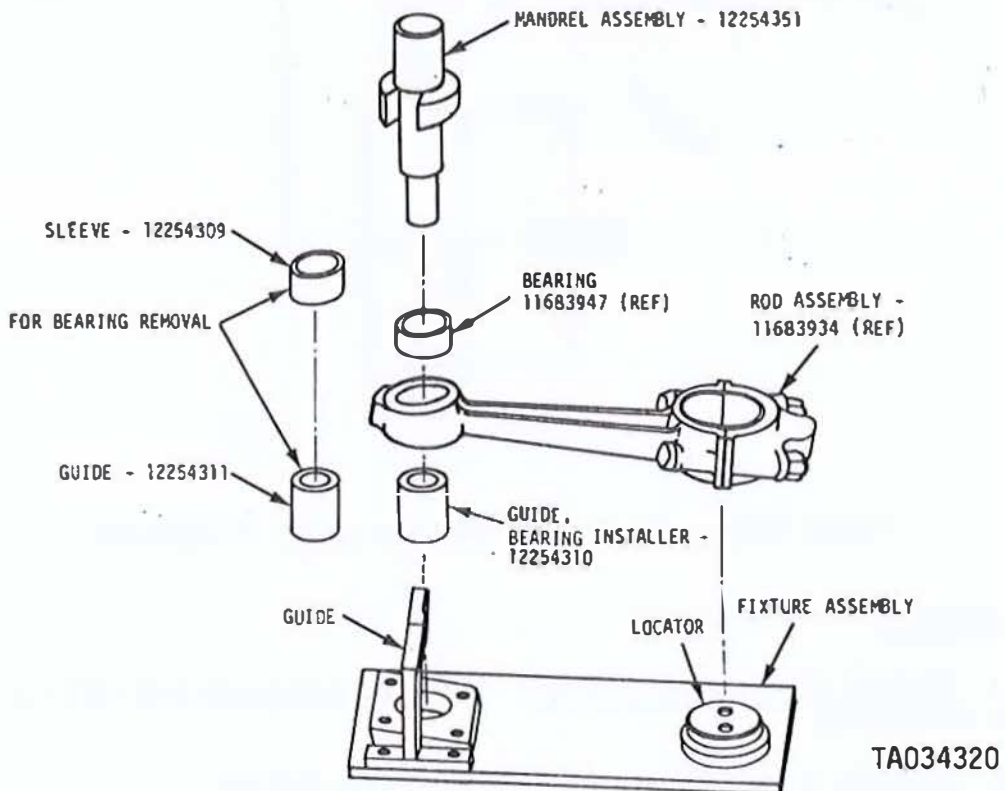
Fixture assembly - installing and removing connecting rod bushing.
